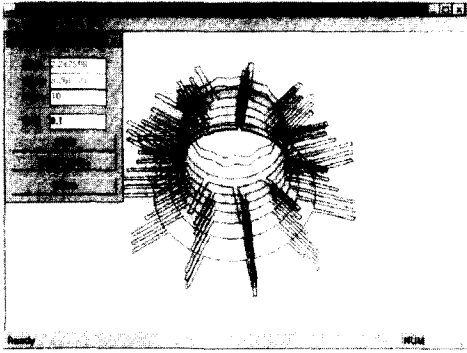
Error check for the 2D slicing data of the impeller pattern
